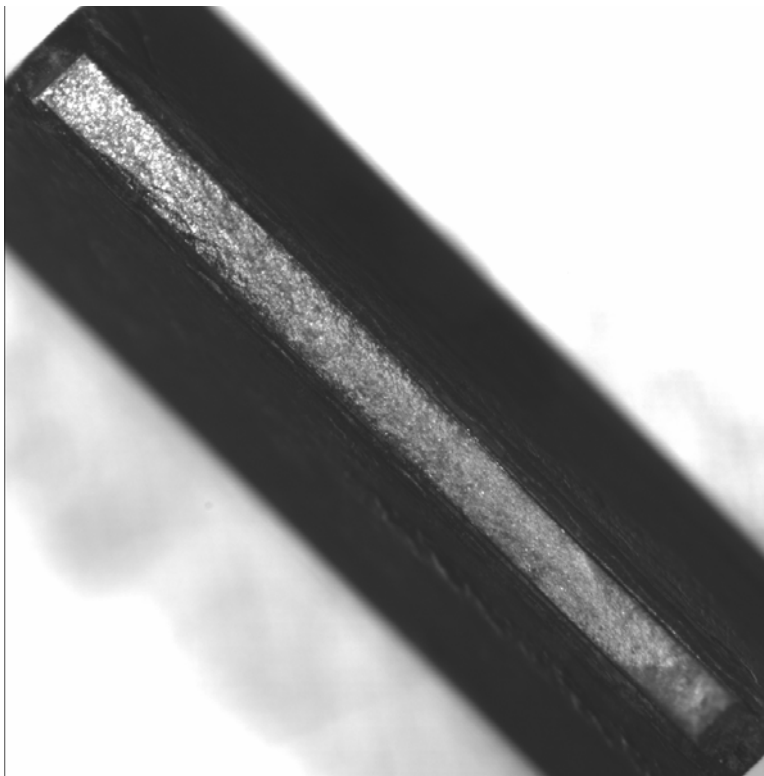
Fracture Surface of Specimen 5932.
